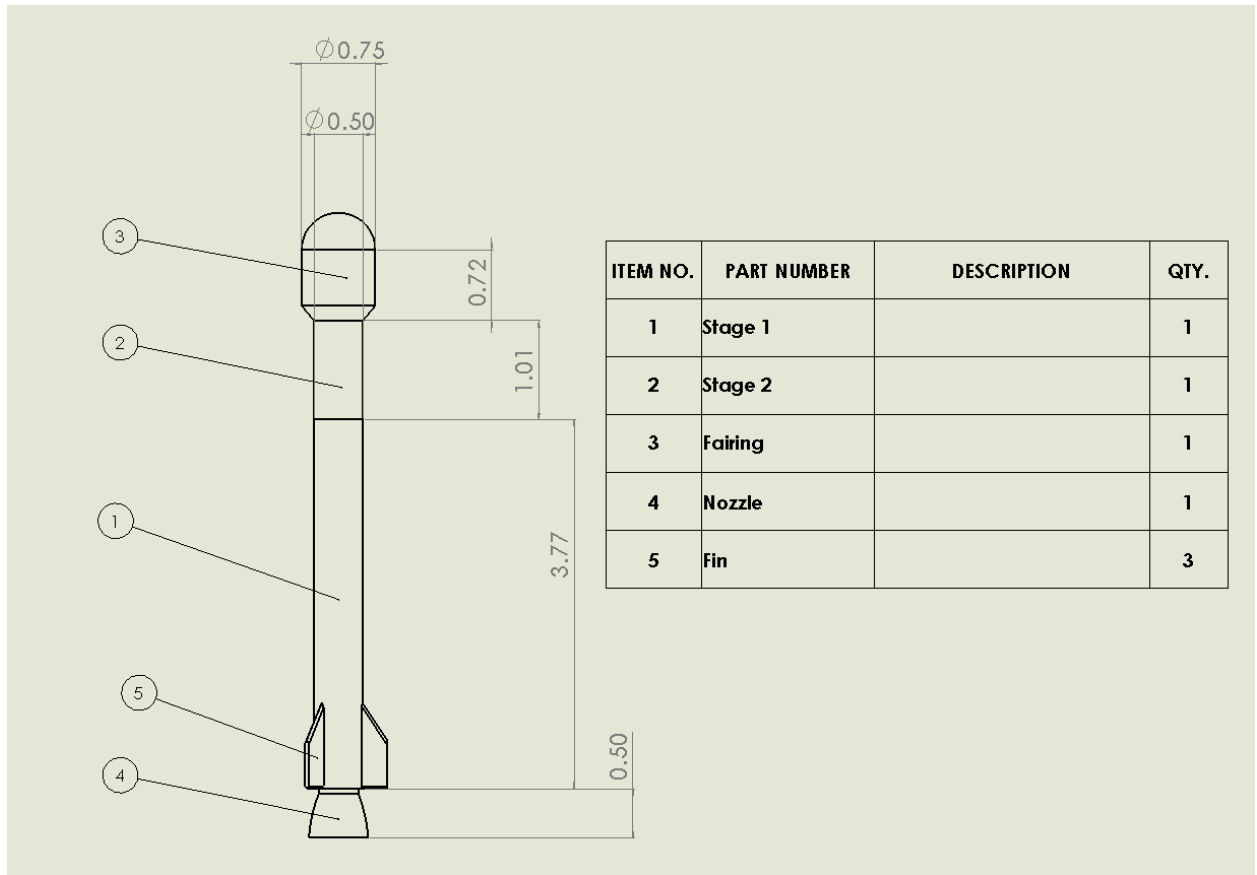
Rocket Dimensions - A drawing showing rocket (with dimensions in meters).
